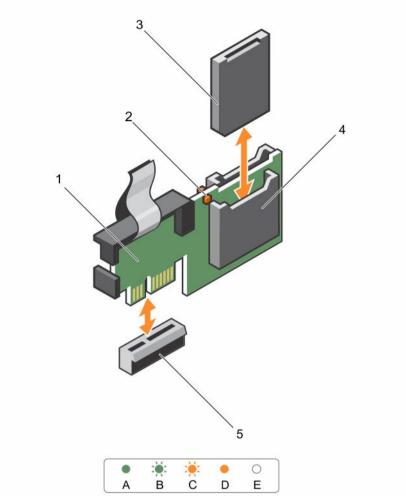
Removing and installing the Internal Dual SD Module (IDSDM)
